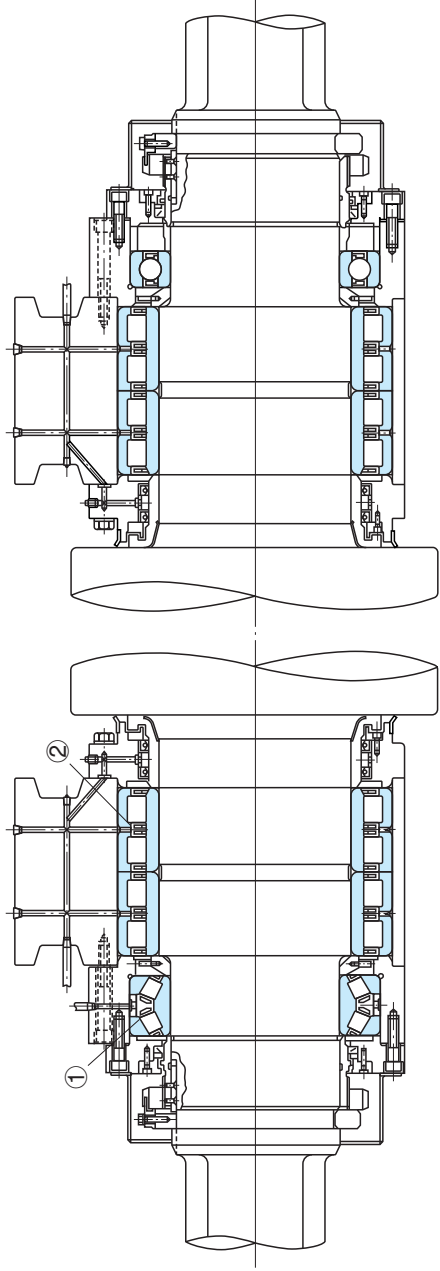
Horizontal Roll Chock Assembly, Large-Size Universal Rolling Mill
